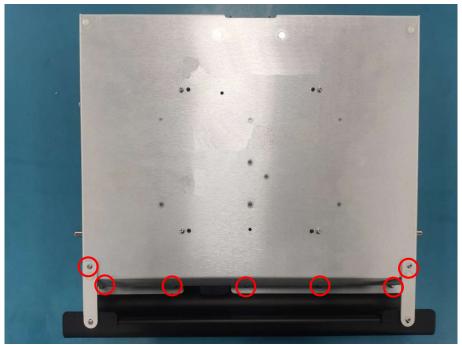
5x Flange Nuts (5.5mm Driver) from front section & 2x (T10 Torx) screws on side braces
